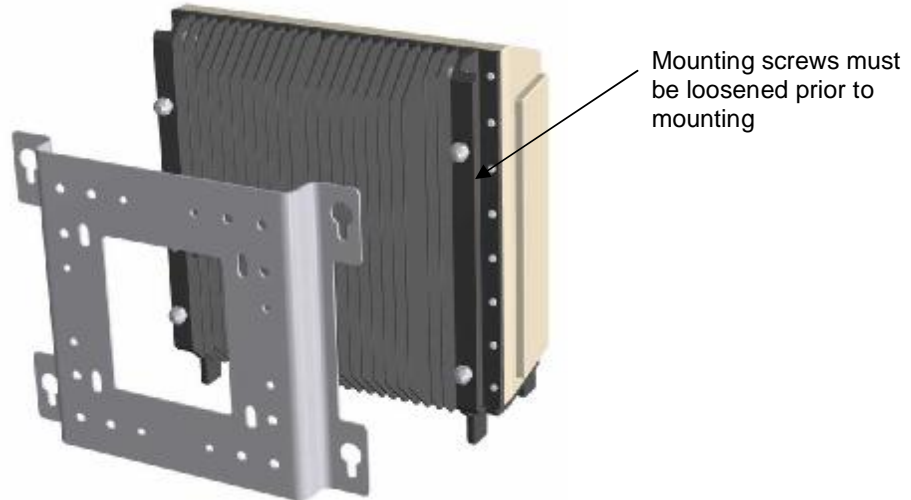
Loosen the four big mounting screws on the back of the TMB. Fit the TMB to the mounting plate and tighten the screws to a torque of 40 Nm.
